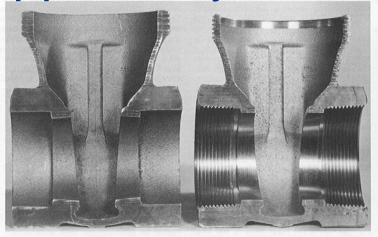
Cutaway views of an as-cast and finish machined/threaded body of a 50 mm (2 in.) gate valve-union bonnet assembly rated at 1.0 MPa (150 psi). The body section was sand cast of C83600 alloy (Cu-55n-5Pb-5Zn composition) and weighs 2.4 kg (5.2 lb). Courtesy of Crane Company
